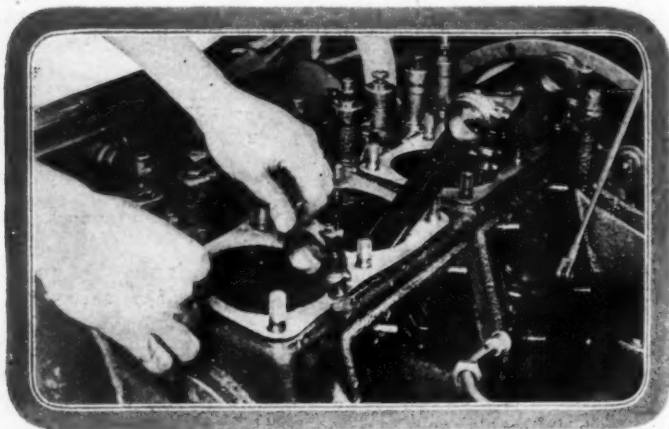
Illustrating method of fitting gasket between cylinder and crankcase castings
